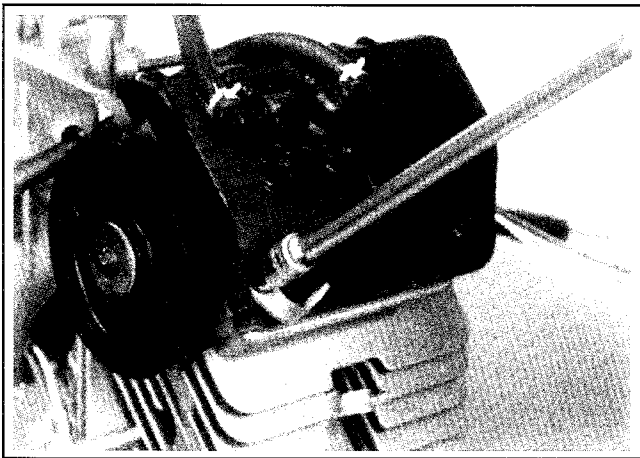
Removing #1 Side Valve Cover/Fuel Pump Assembly.
